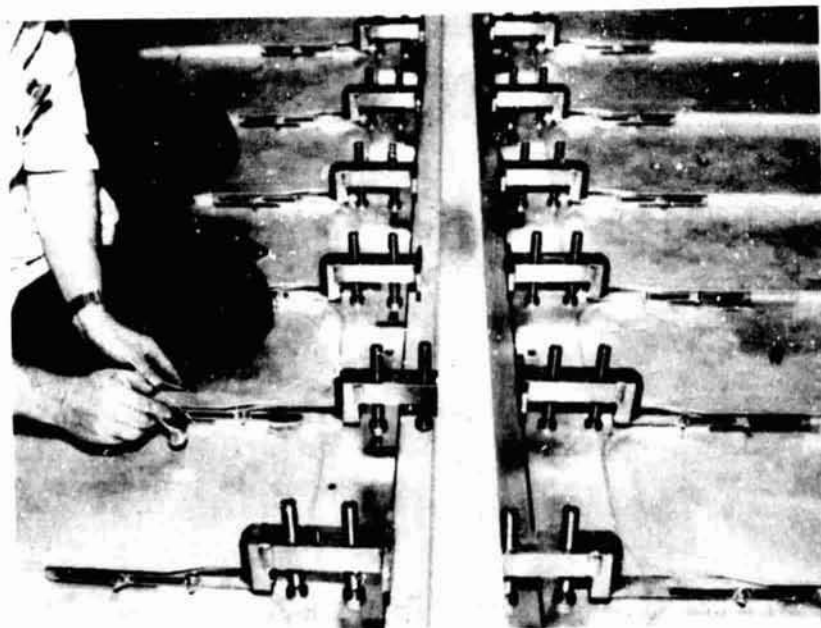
Installation of ET Barrel Assembly Weld Alignment Clamps.
